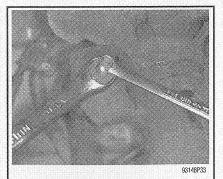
To remove the stabilizer link from the air spring housing, use two wrenches
